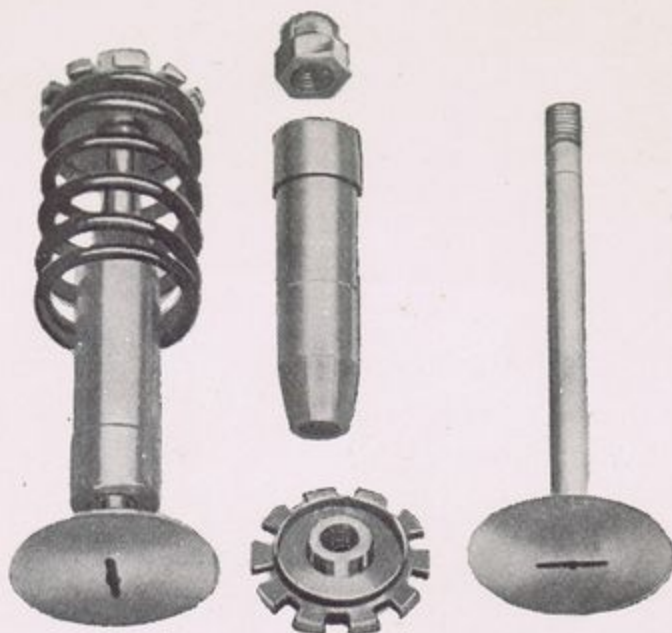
SHOWING VALVE AND VALVE GUIDE COMPONENTS
